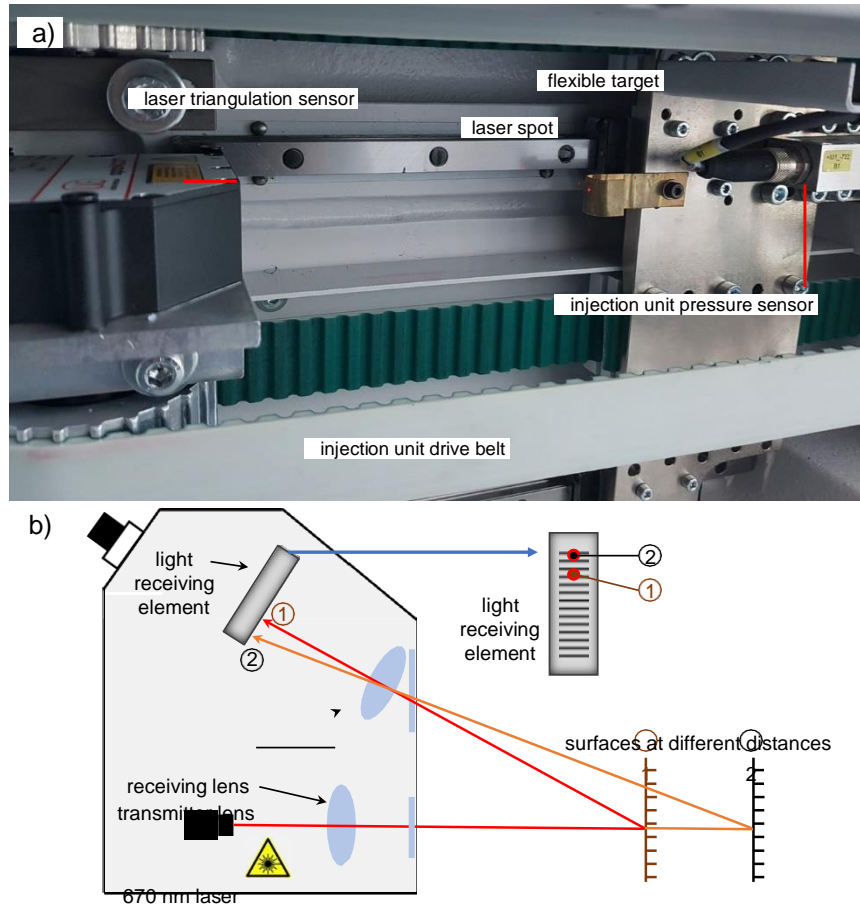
Laser displacement sensor attachment at the back of the Micropower 15 injection unit. (a) shows the injection unit of the machine. (b) depicts the physical principles behind the laser triangulation measurements.
